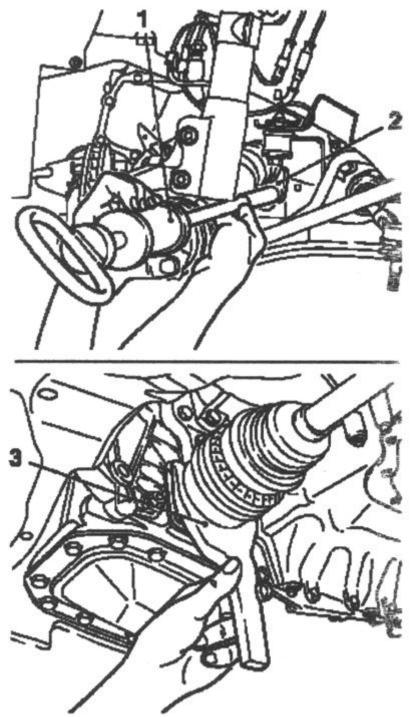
Extract shaft wheels: 1, 2, 3 - special tool
